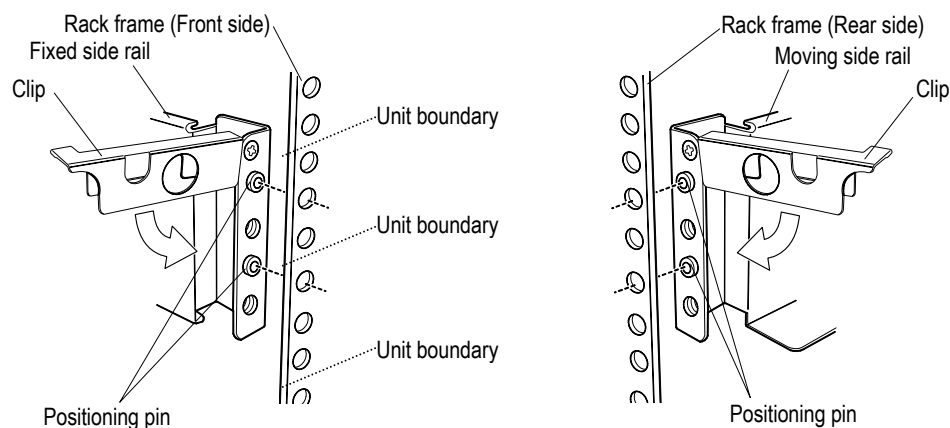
Installing Rack Rails (Circular Hole) for Drive Box (2U)-2
